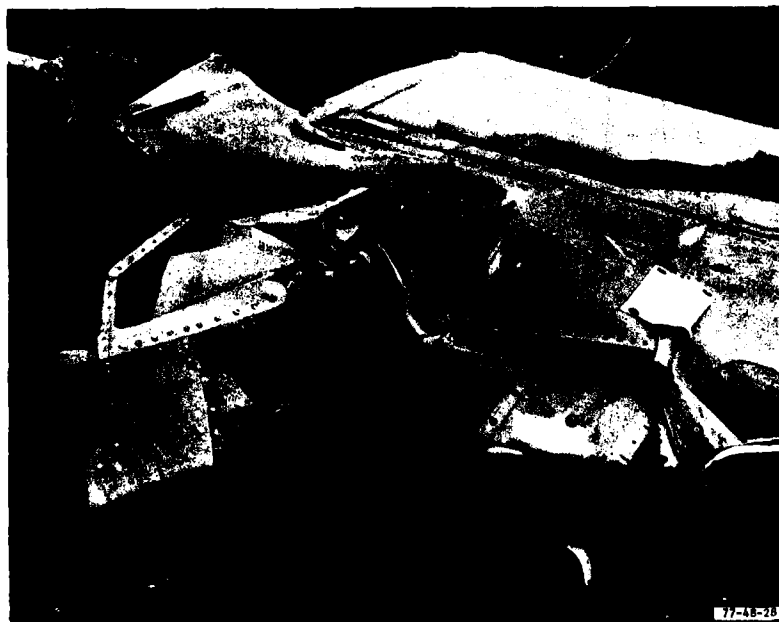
DAMAGE TO RIGHT WING, TEST 3
